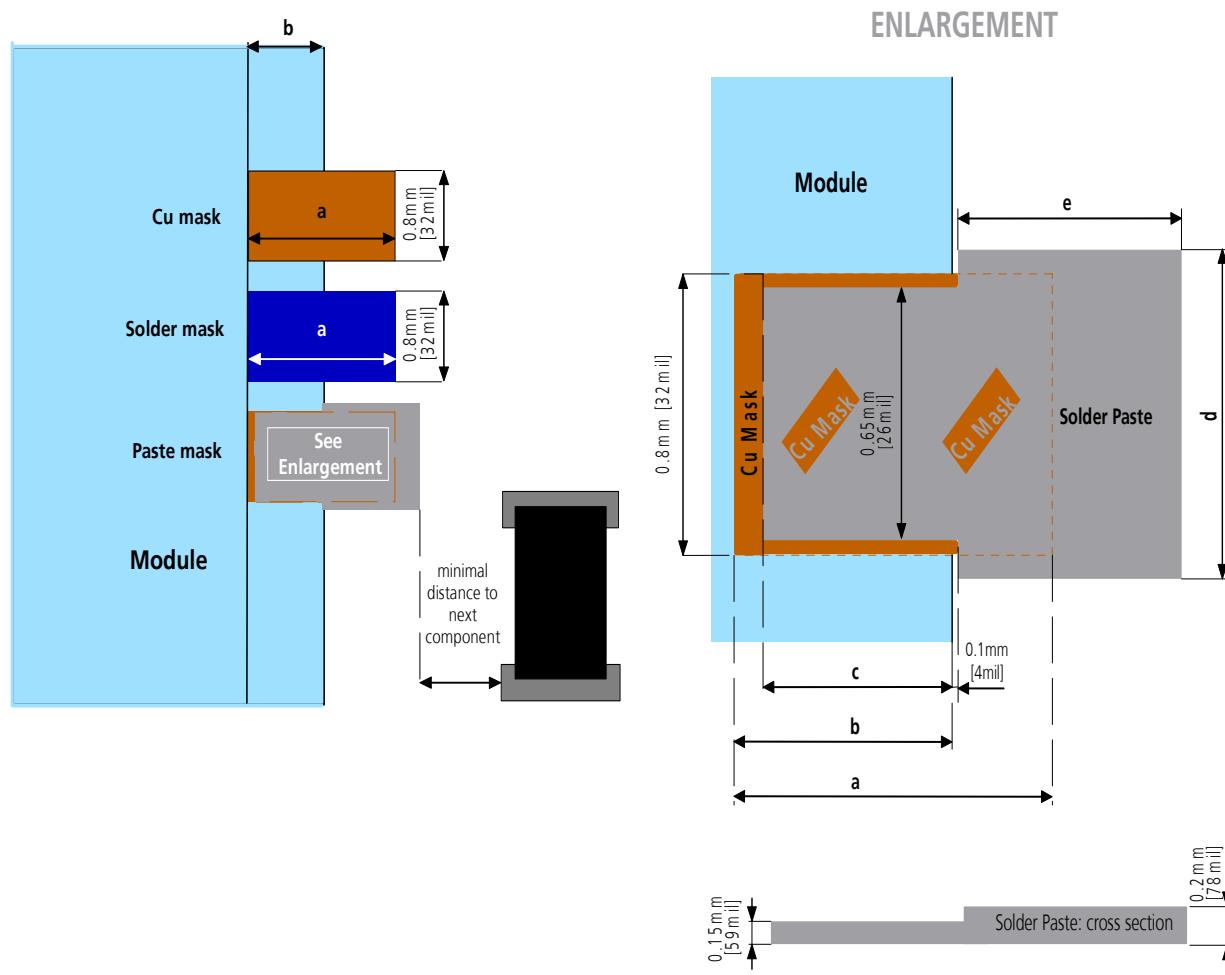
Solder and paste mask with enlargement showing positioning and cross section of underlying solder paste
